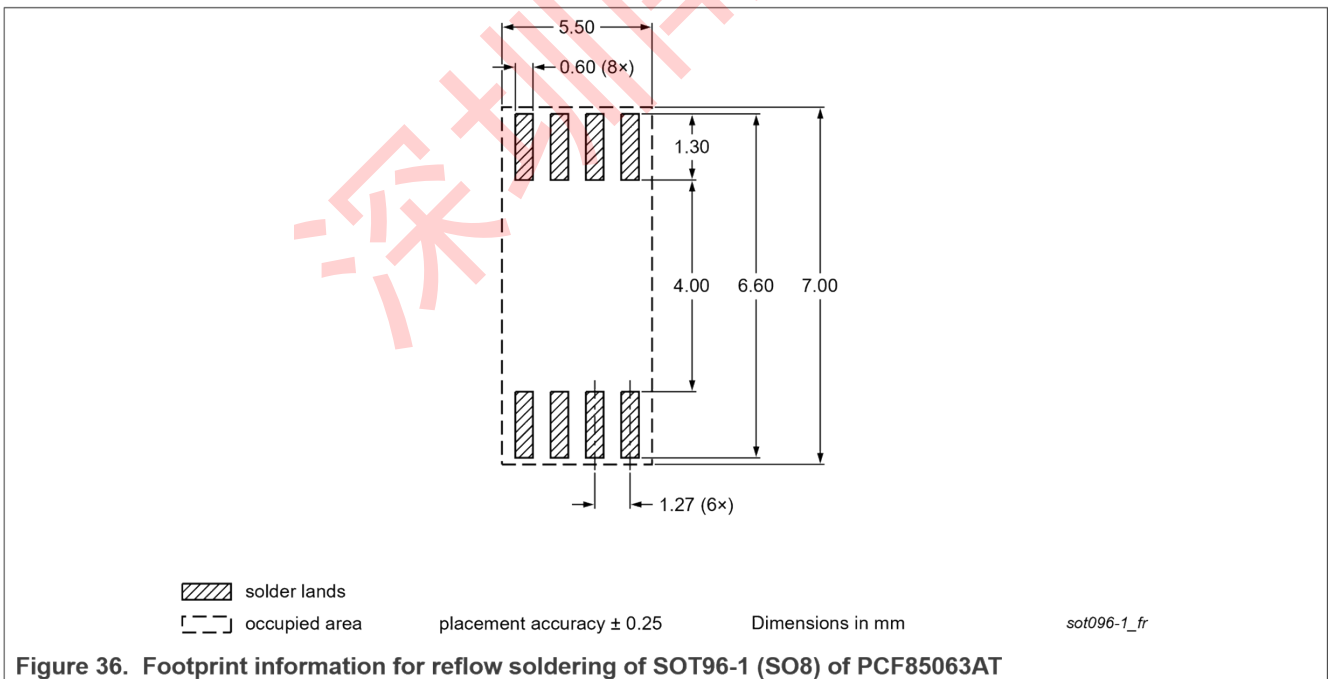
Footprint information for reflow soldering of SOT96-1 (SO8) of PCF85063AT
